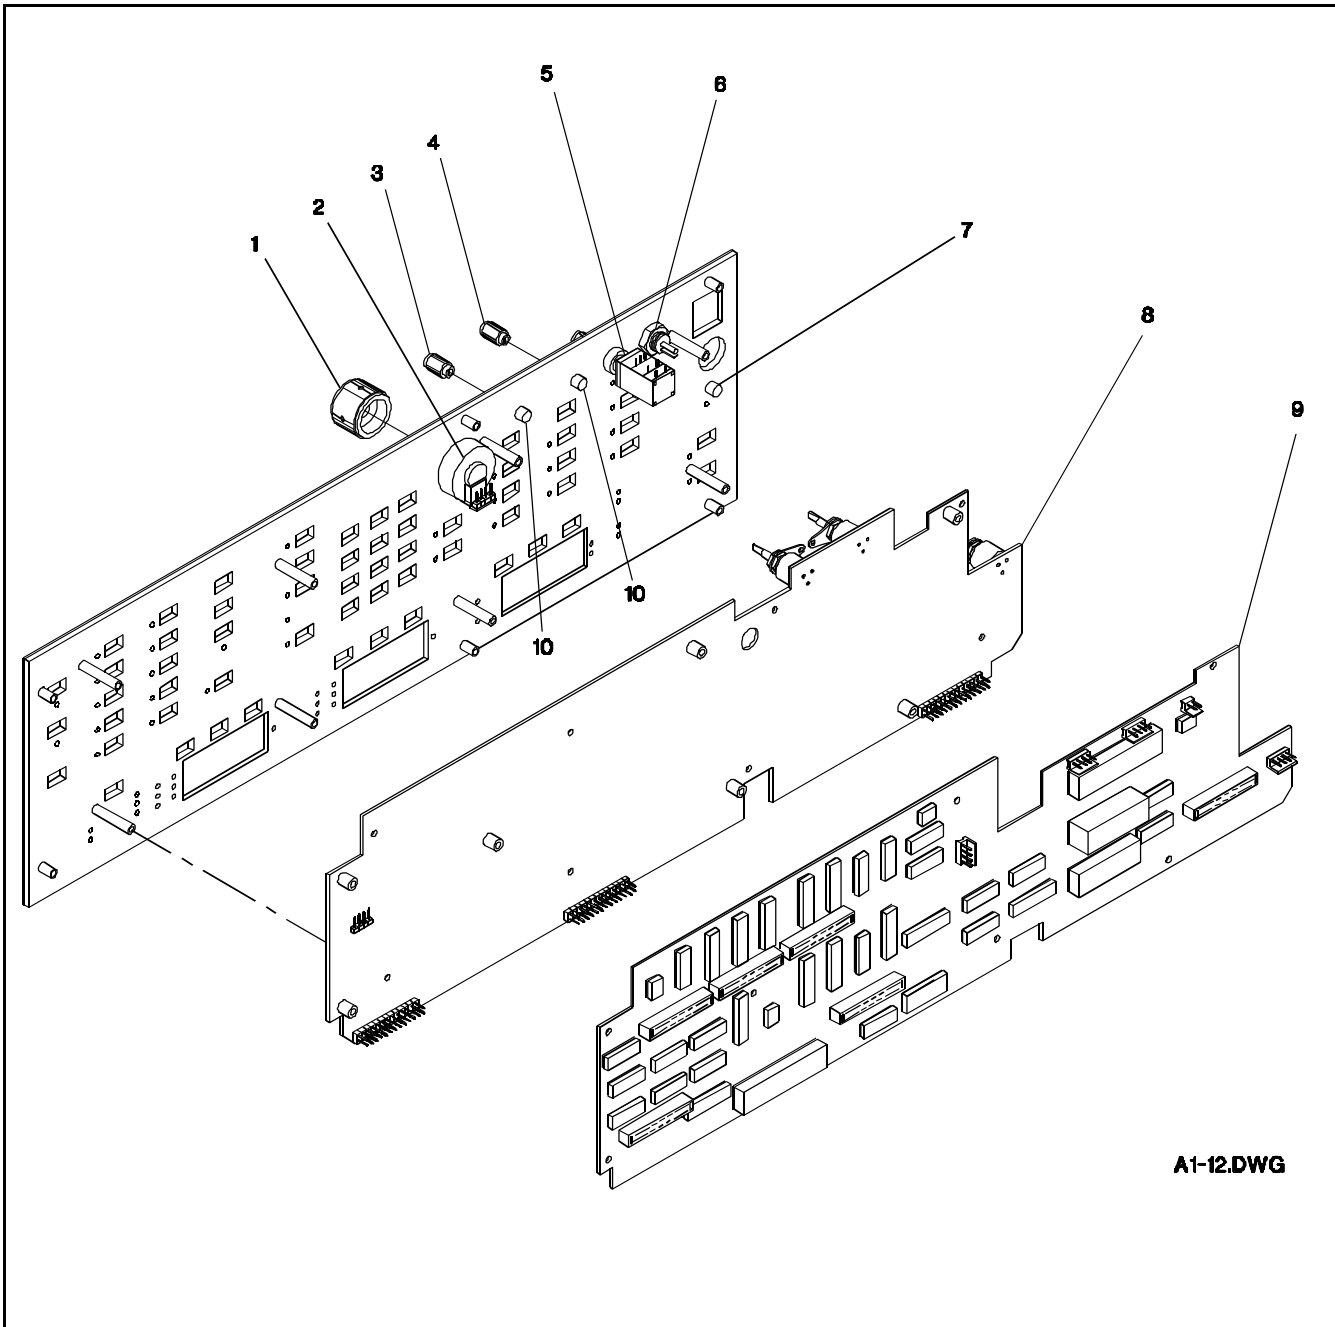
A1 Basic Frame Assembly Parts (3 of 4)
